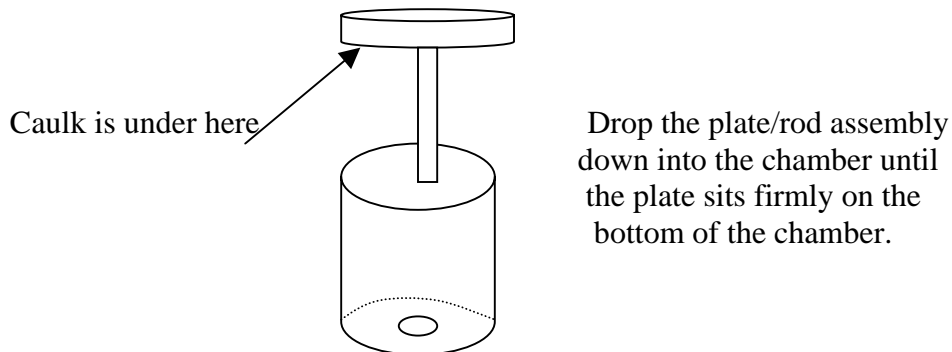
This shows the relative position of the caulked plate/rod assembly prior to insertion into the chamber.
